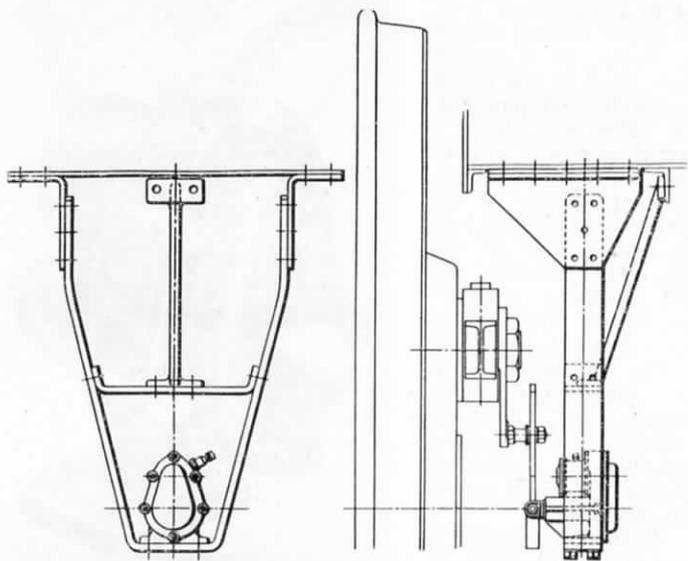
TYPICAL GEARBOX SUSPENSION BRACKET, STONE-DEUTA SPEED INDICATOR.
